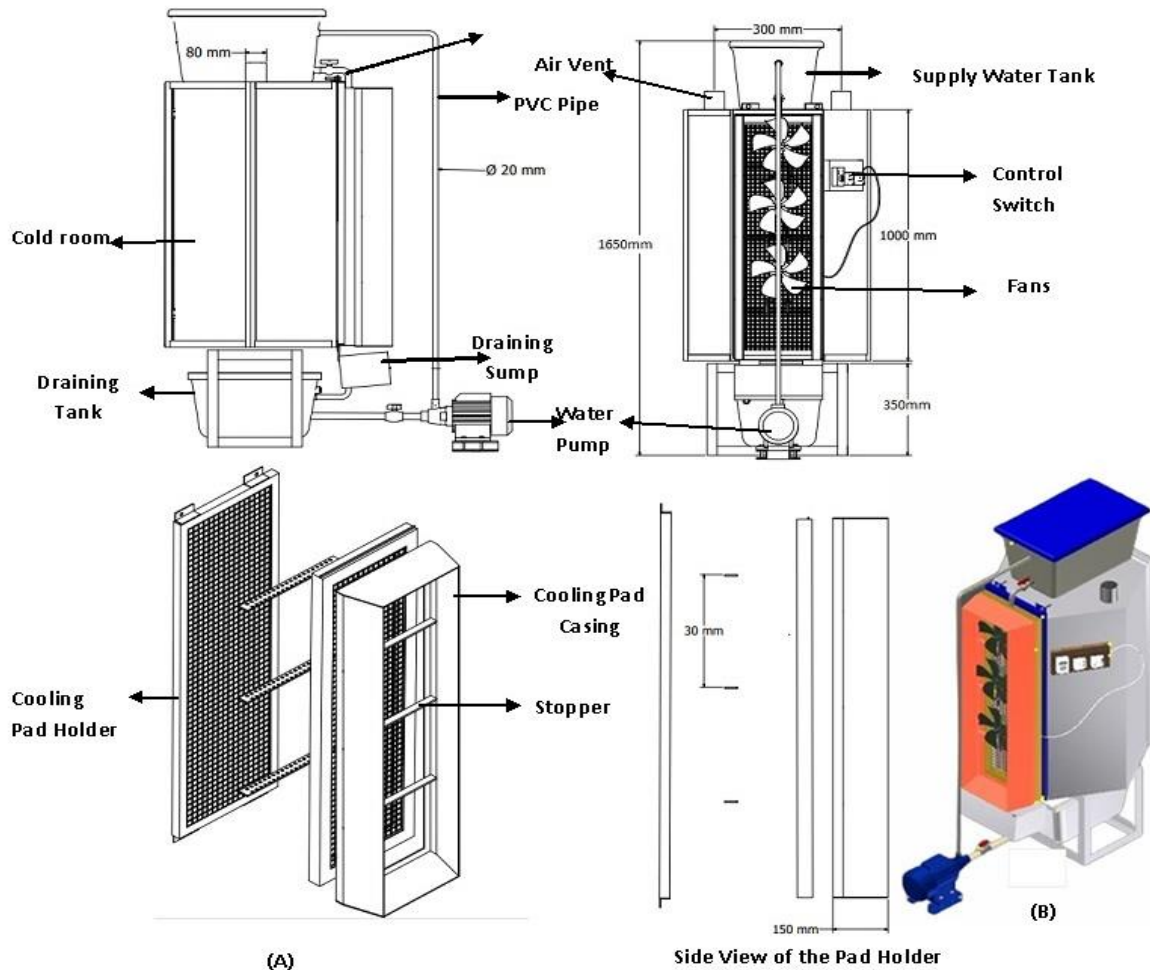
(A) Orthographic view of the prototyped evaporative cooler showing the front and side elevation of the major components (B) Isometric diagram of the prototyped developed evaporative cooling system
